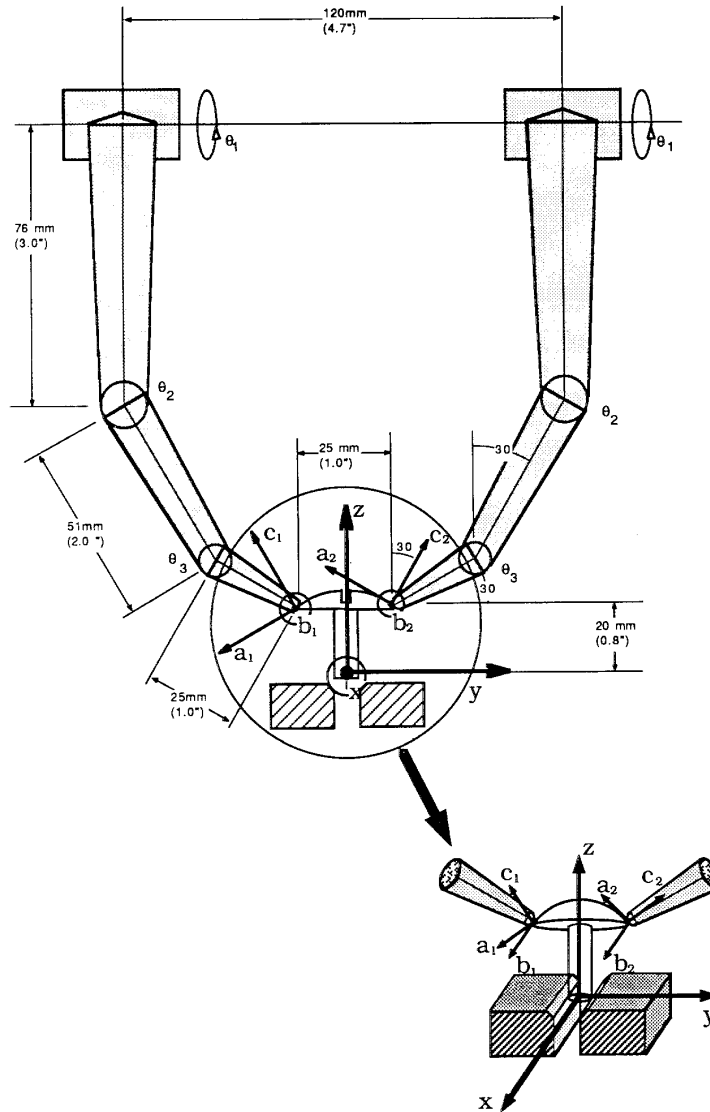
Assembling a rivet with two soft-tipped fingers.
